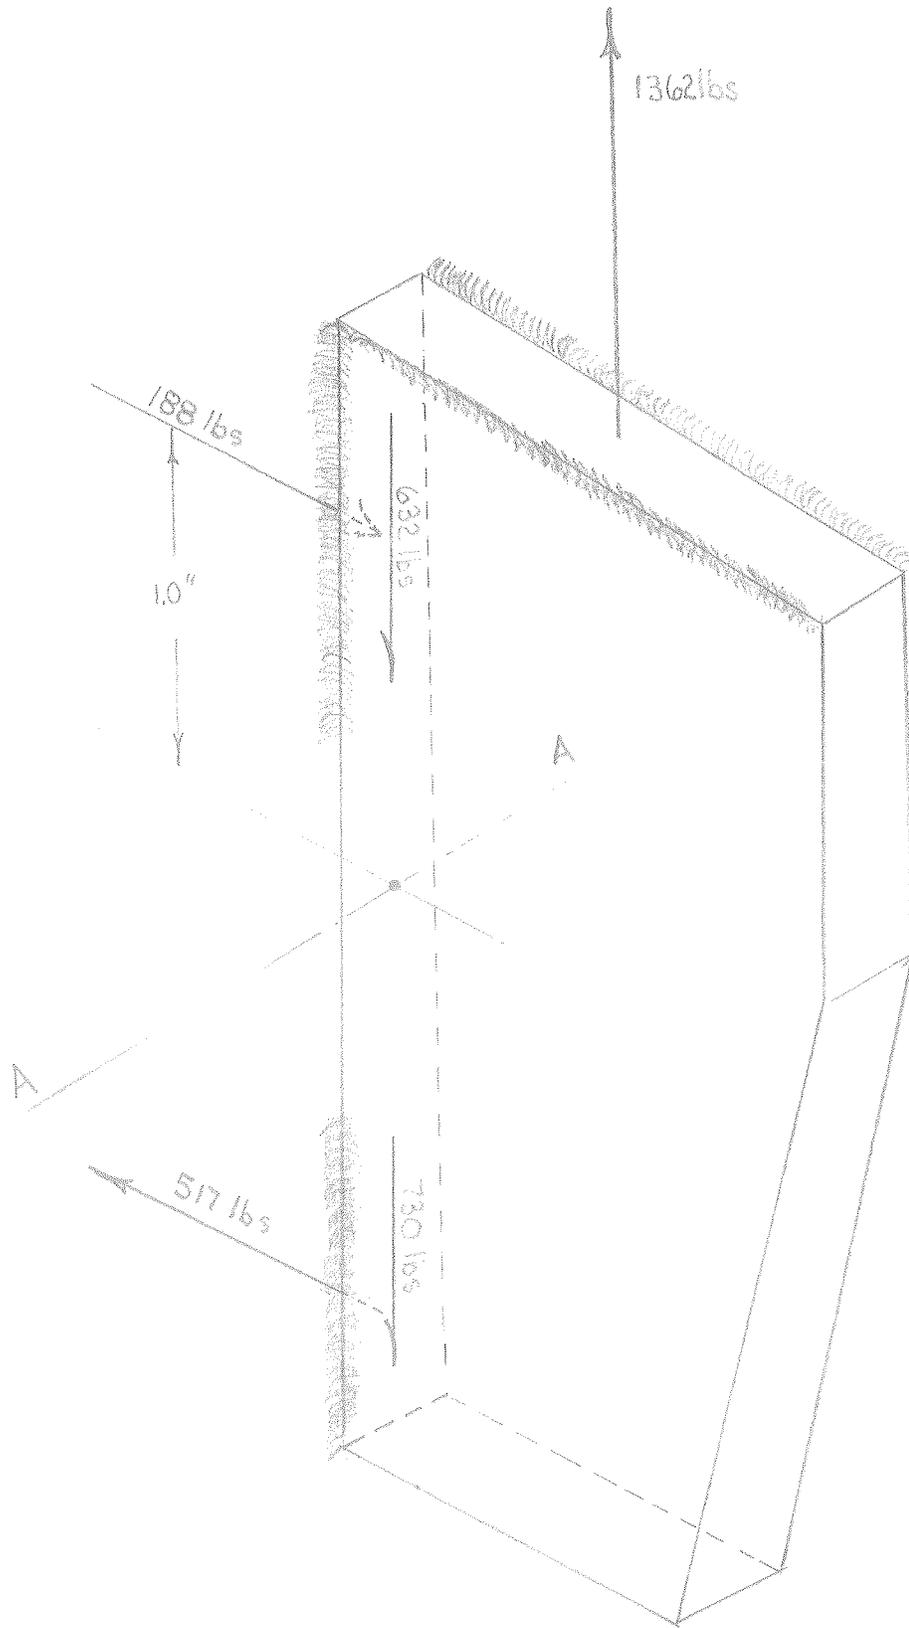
Forces acting on fillet welds in tophat/flange gussets
